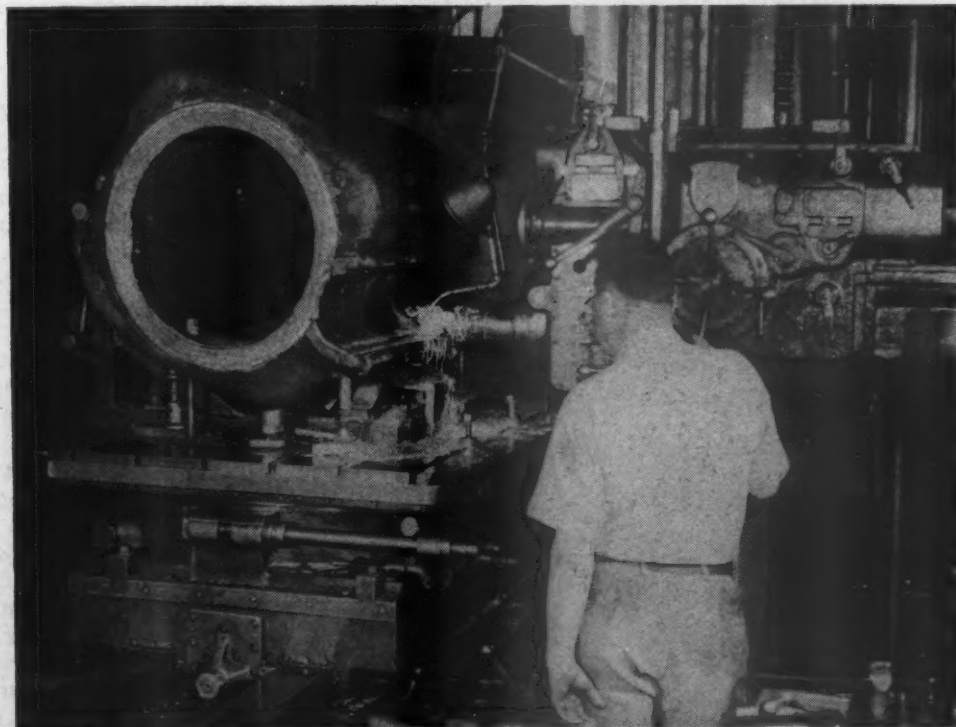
From the bearing-cap seats shown, all finish machining dimensions will be calculated
